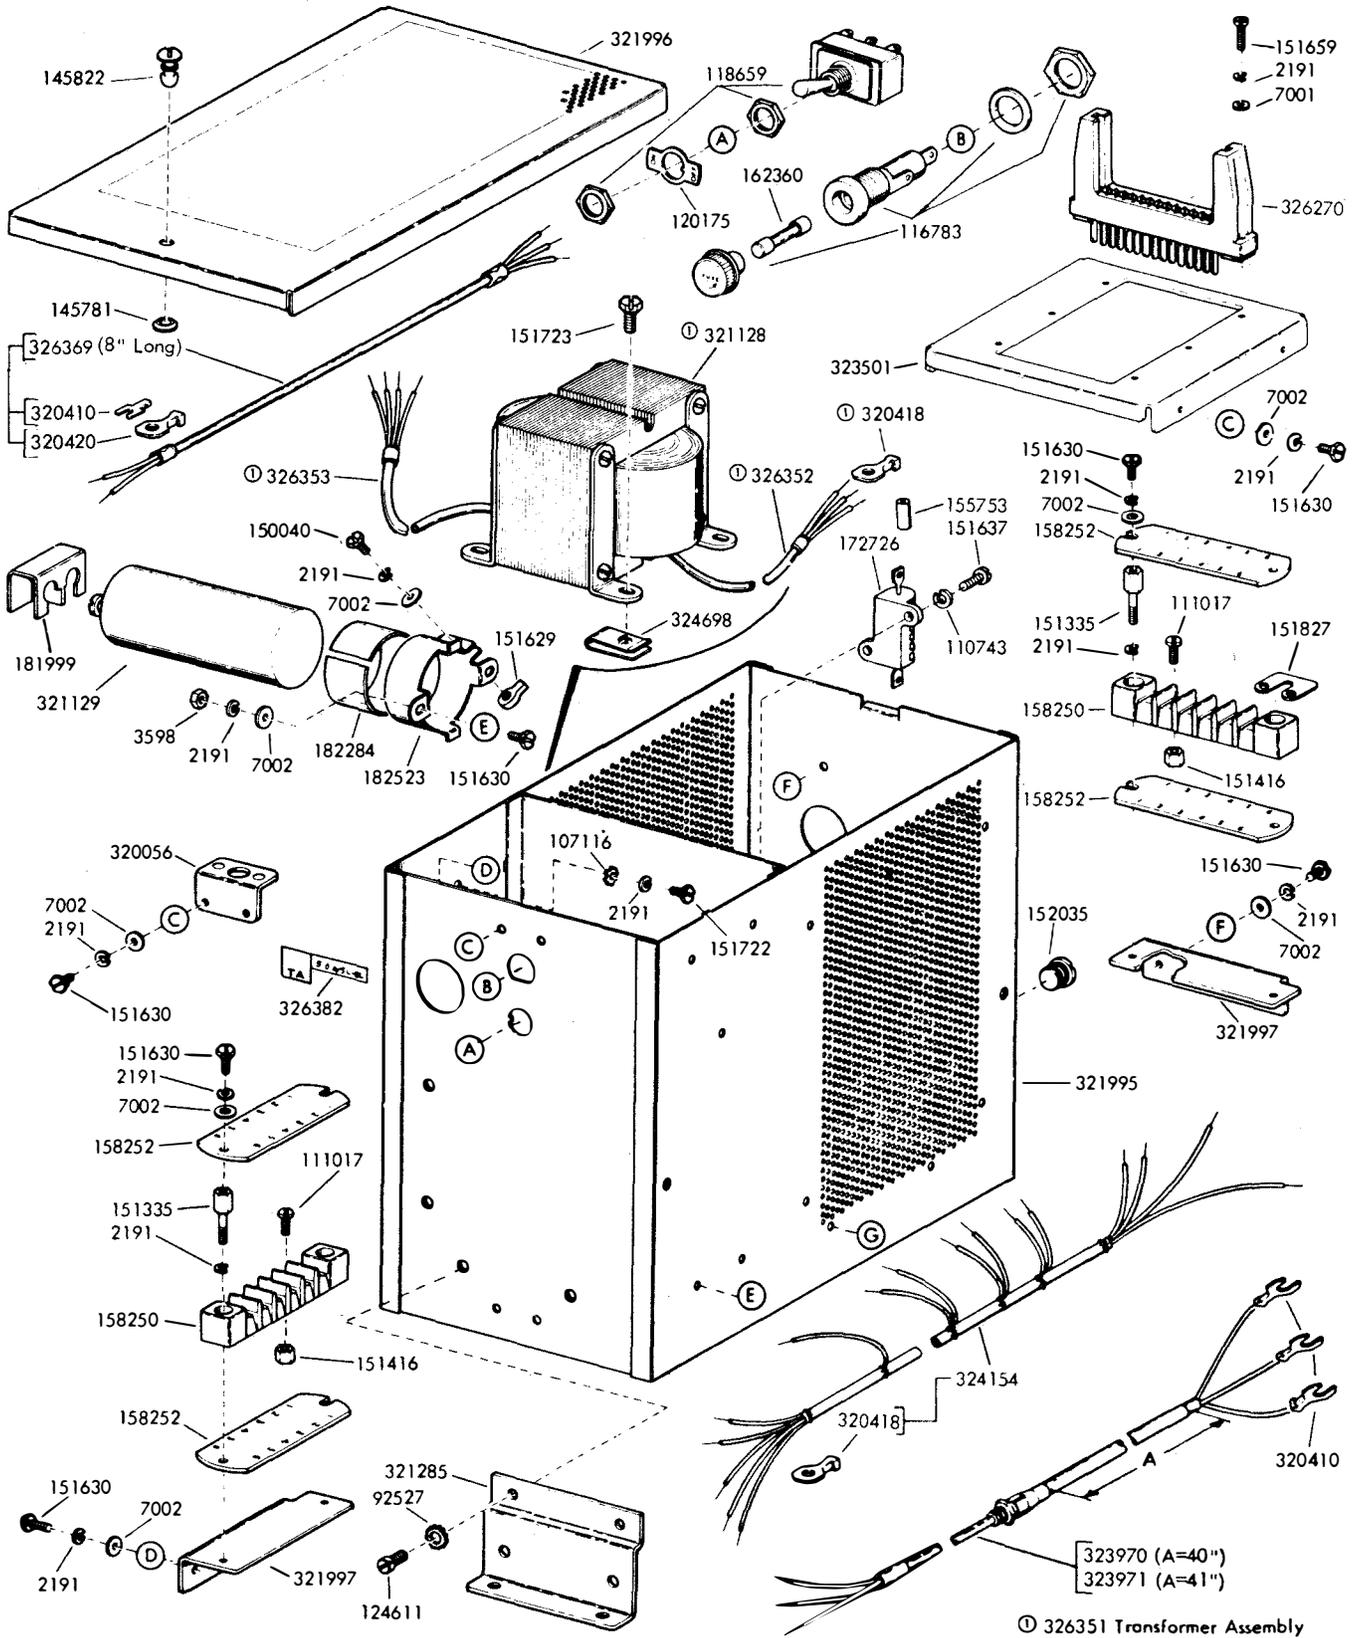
Electrical Service Assembly 326792 - Used with Mini TD Set (Sheet 1 of 2)
